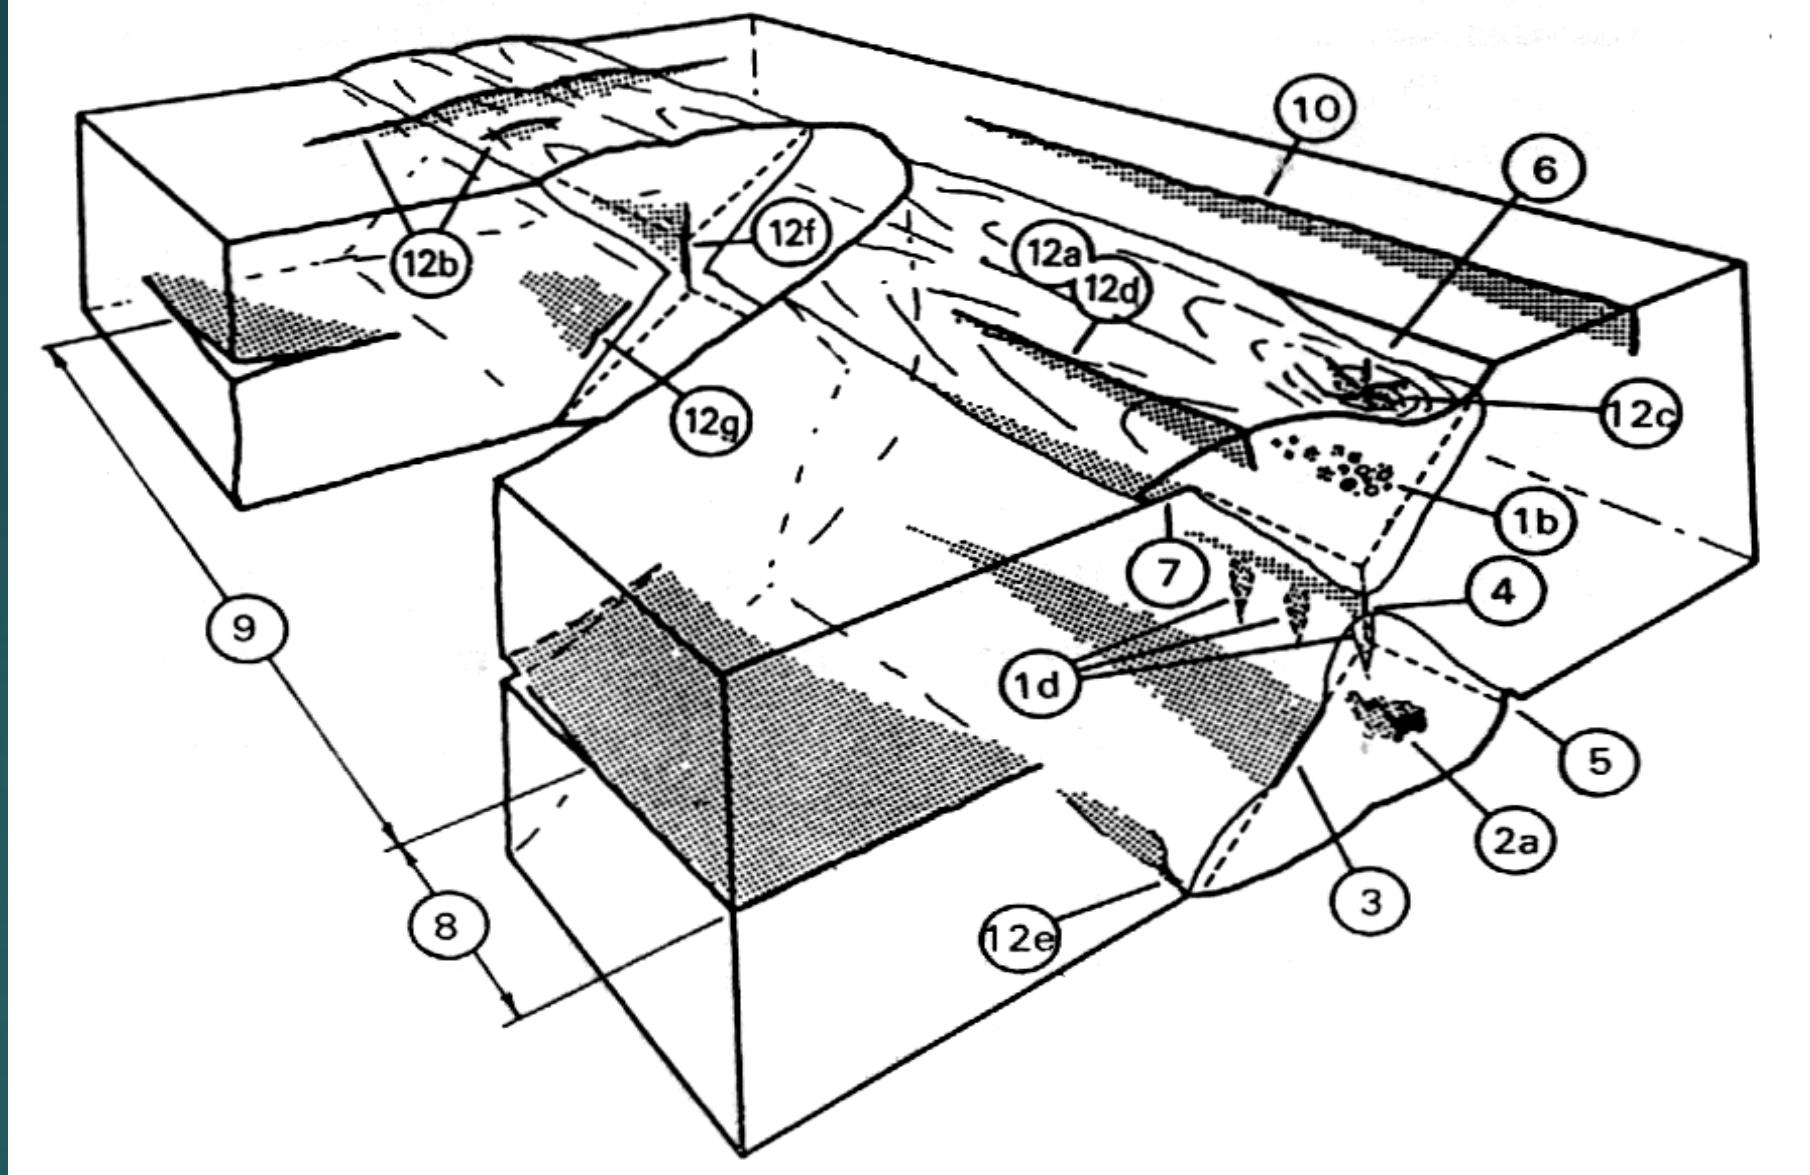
Double-V-Groove Weld in Butt Joint
